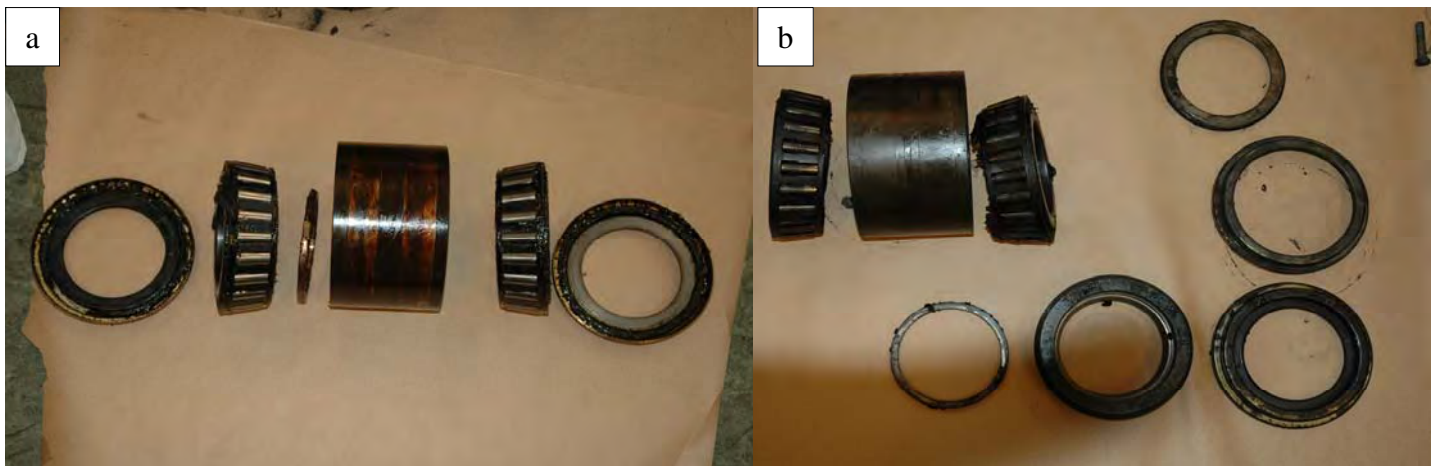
Bearing #2 and b: Bearing #3 as received for investigation of possible failure.
